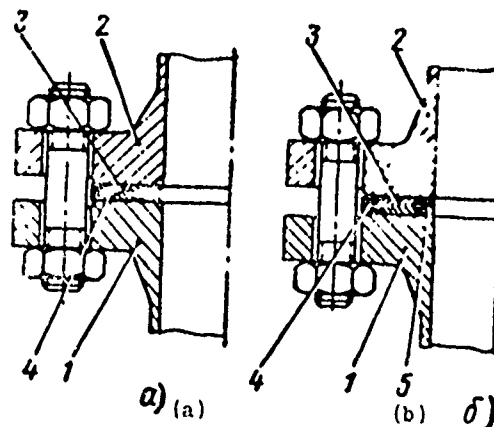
Sealing assemblies using spiral-wound gaskets with flat flanges: a - with outer spacer ring; b - with inner and outer spacer rings; 1, 2 - flanges; 3 - gasket; 4 - outer spacer ring; 5 - inner spacer ring.
